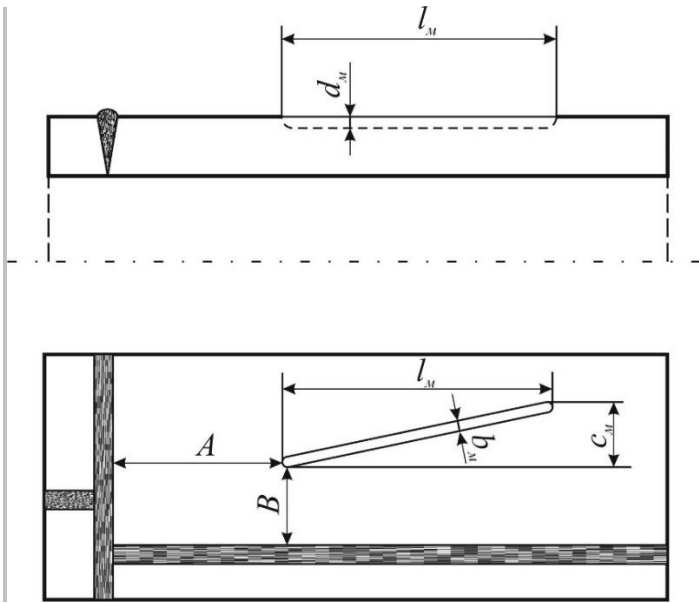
Machining tool marks, tears, mechanical damage
